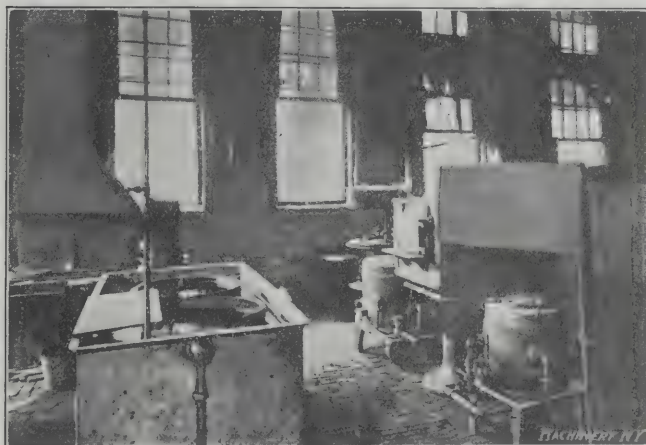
Barium-chloride Hardening Furnaces and Cooling Tanks
